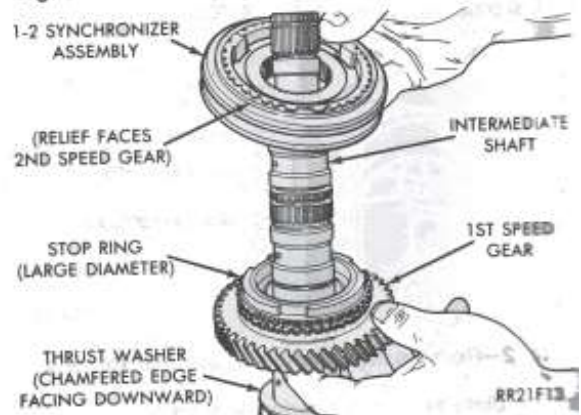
1st Speed Gear, and 1-2 Synchronizer Assembly (A525)
